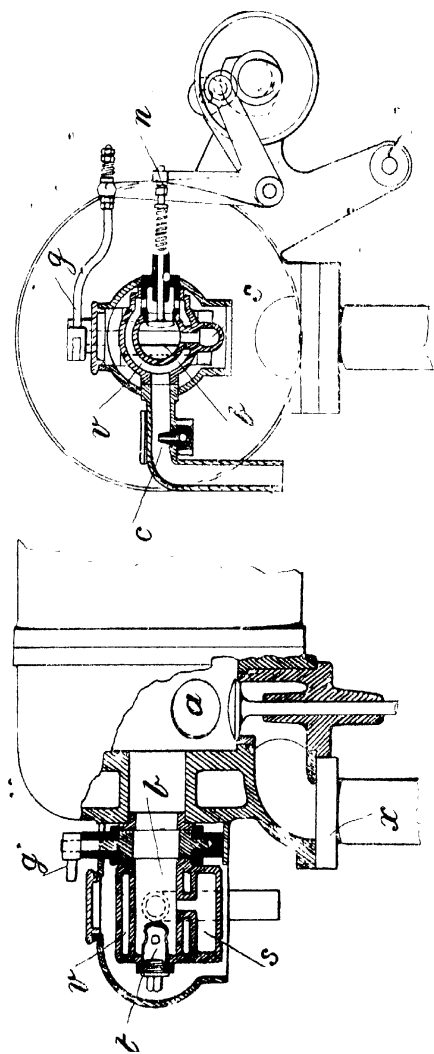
Vapour-feed vaporiser with automatic igniter, used in the Blackstone engine for paraffin.
